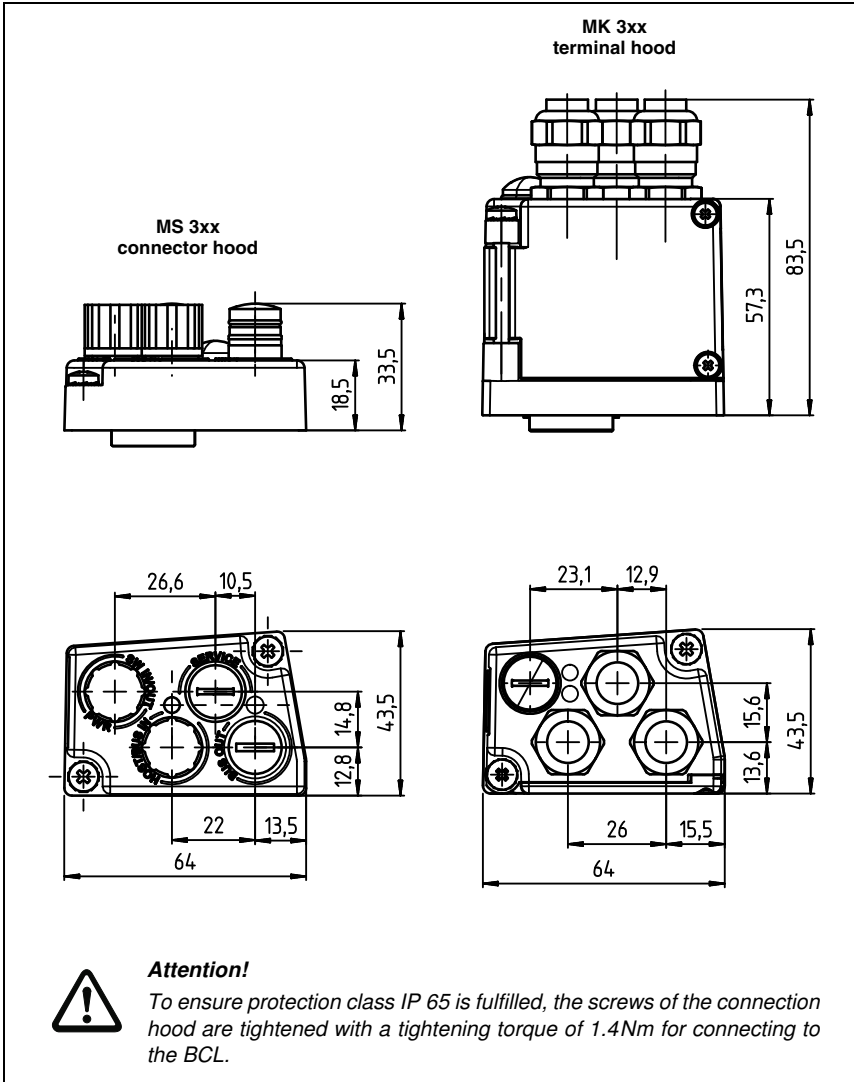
Dimensioned drawing of MS 3xx connector hood / MK 3xx terminal hood
